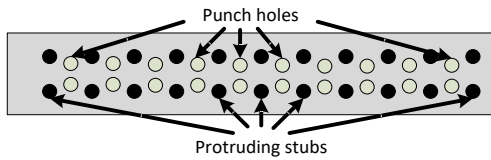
Steel belt for electric machine coupled with support rotary cylindrical wheel
